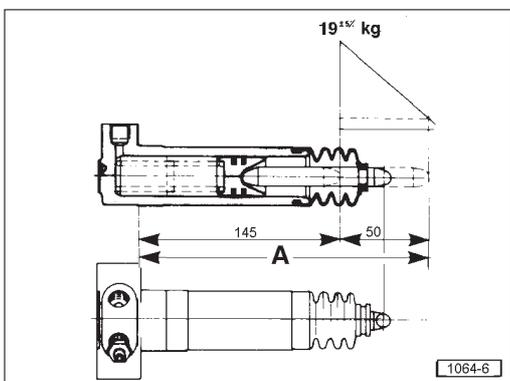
Clutch assembly hydraulic operating cylinder.
